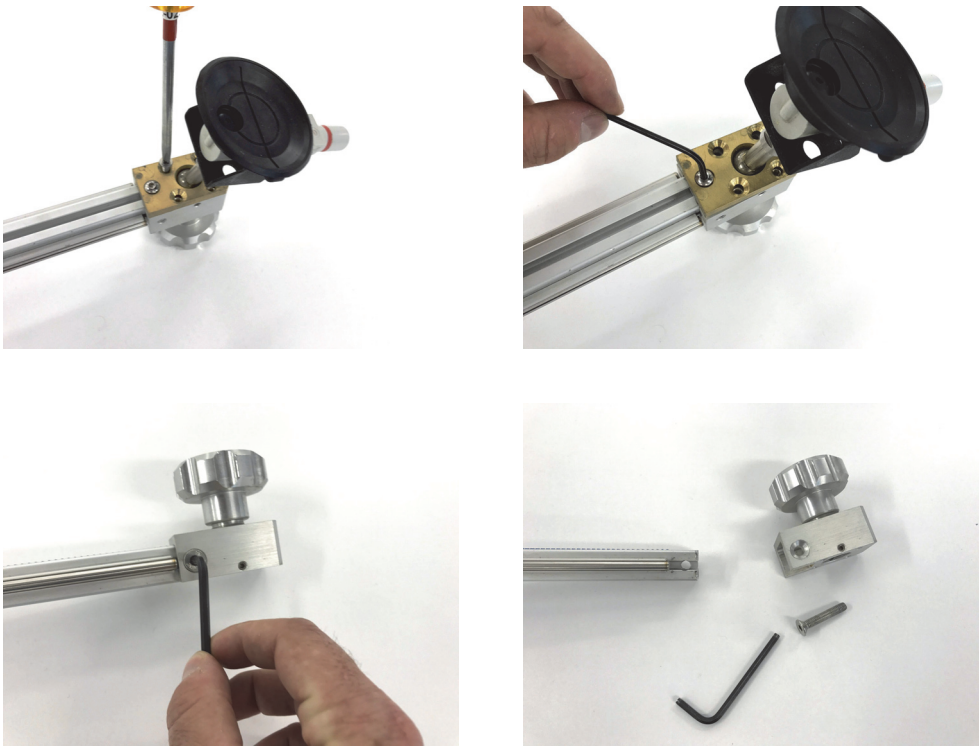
Removing a mounting pod (*top*) and pod bracket (*bottom*)
